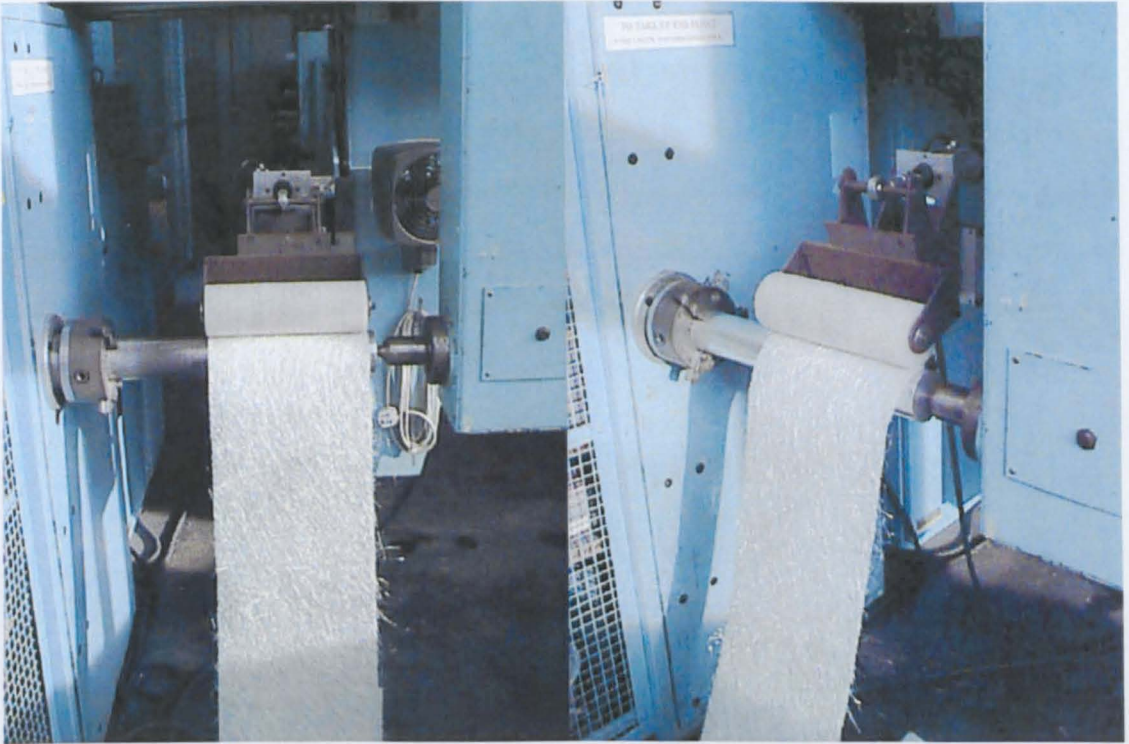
Filament winding machine used for performing 89.1mm diameter CoFRM/Crystic tubes (from Duckett [5])
